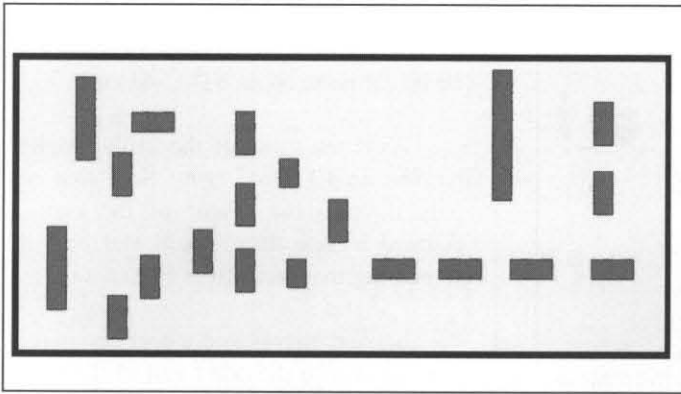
Template for laying out Manhattan-style pads on PC board (actual size is approximately 2.75" x 8.5").
